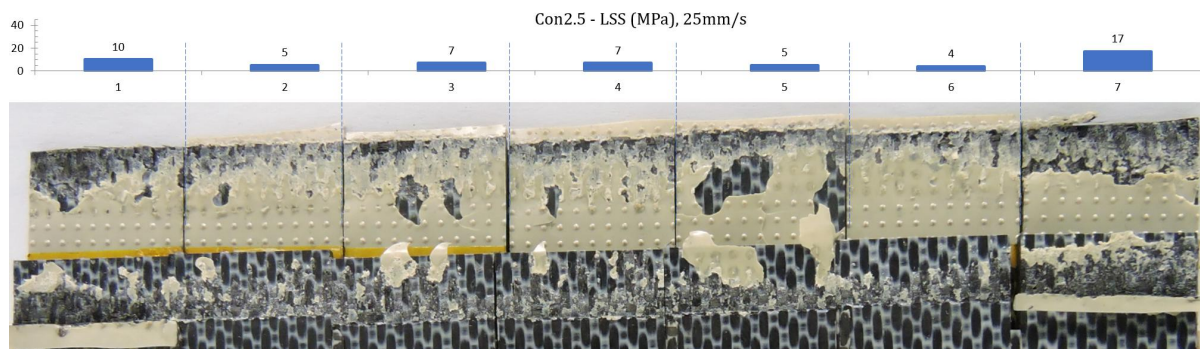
The fracture surfaces at a welding speed of 25mm/s
